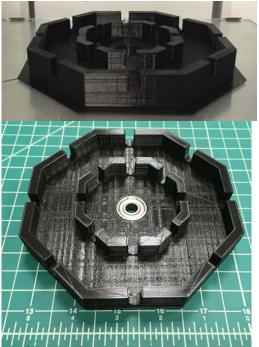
fitting the bearing into the stator and then press the rotor into the bearing
